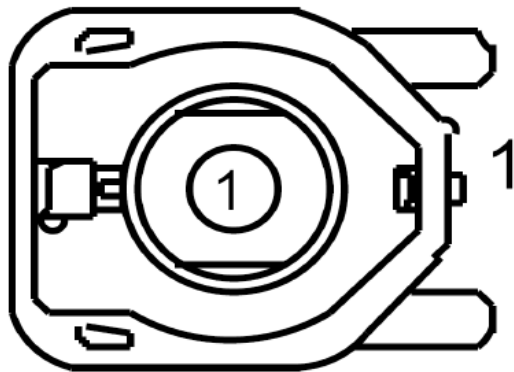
Coupler Assembly 2 Connector End View (C1535)
